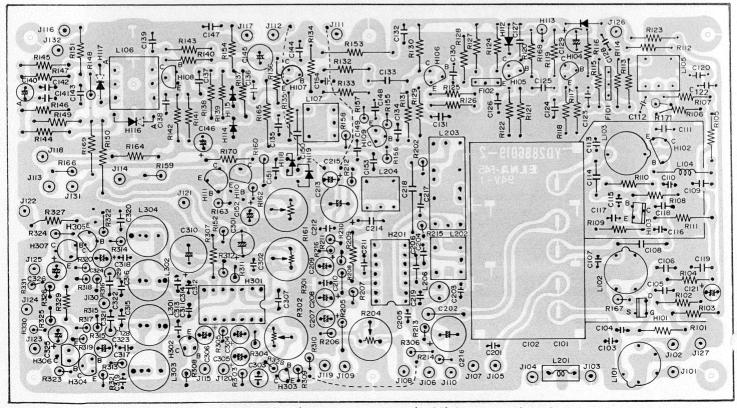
FM/AM Tuner Assembly (P100) Component Locations
